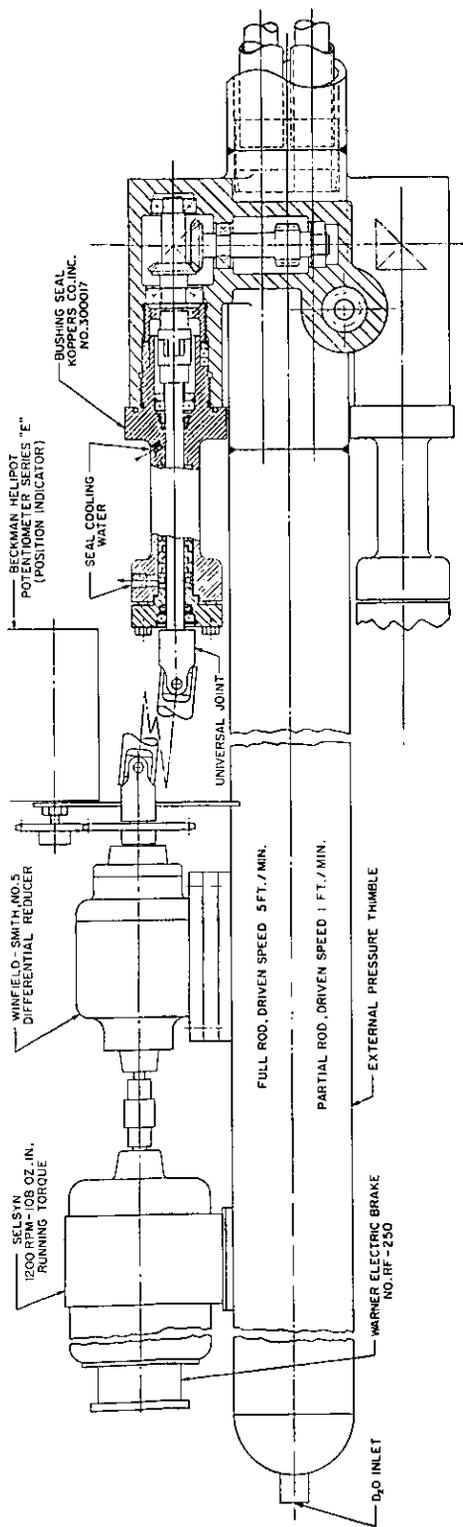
PRESSURE VESSEL REACTOR - CONTROL ROD CLUSTER - BOTTOM DRIVE
